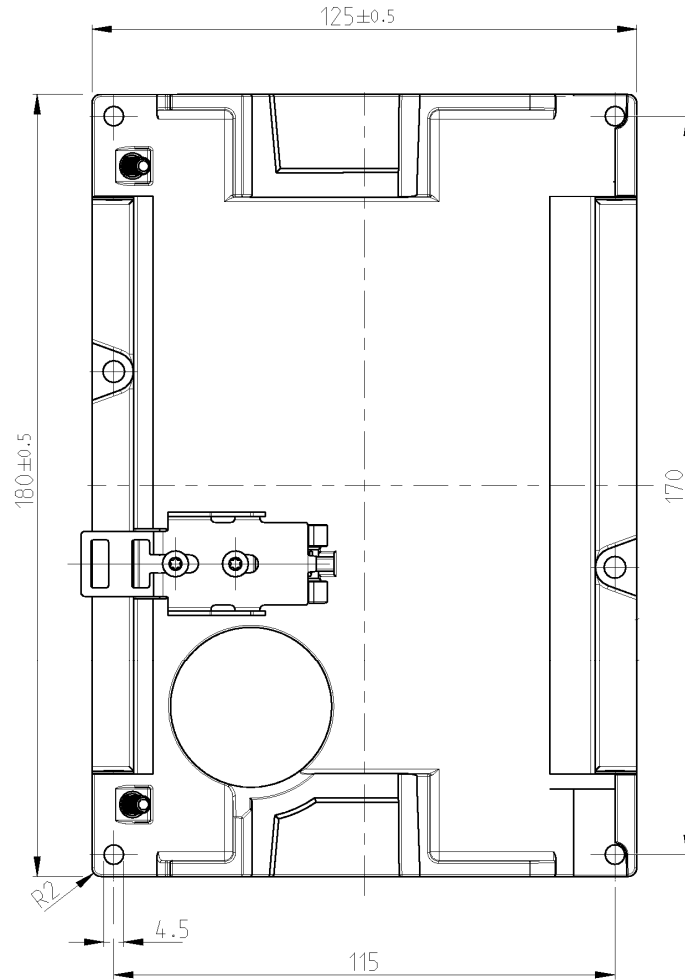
Dimension drawing rear view of the SCALANCE X124
